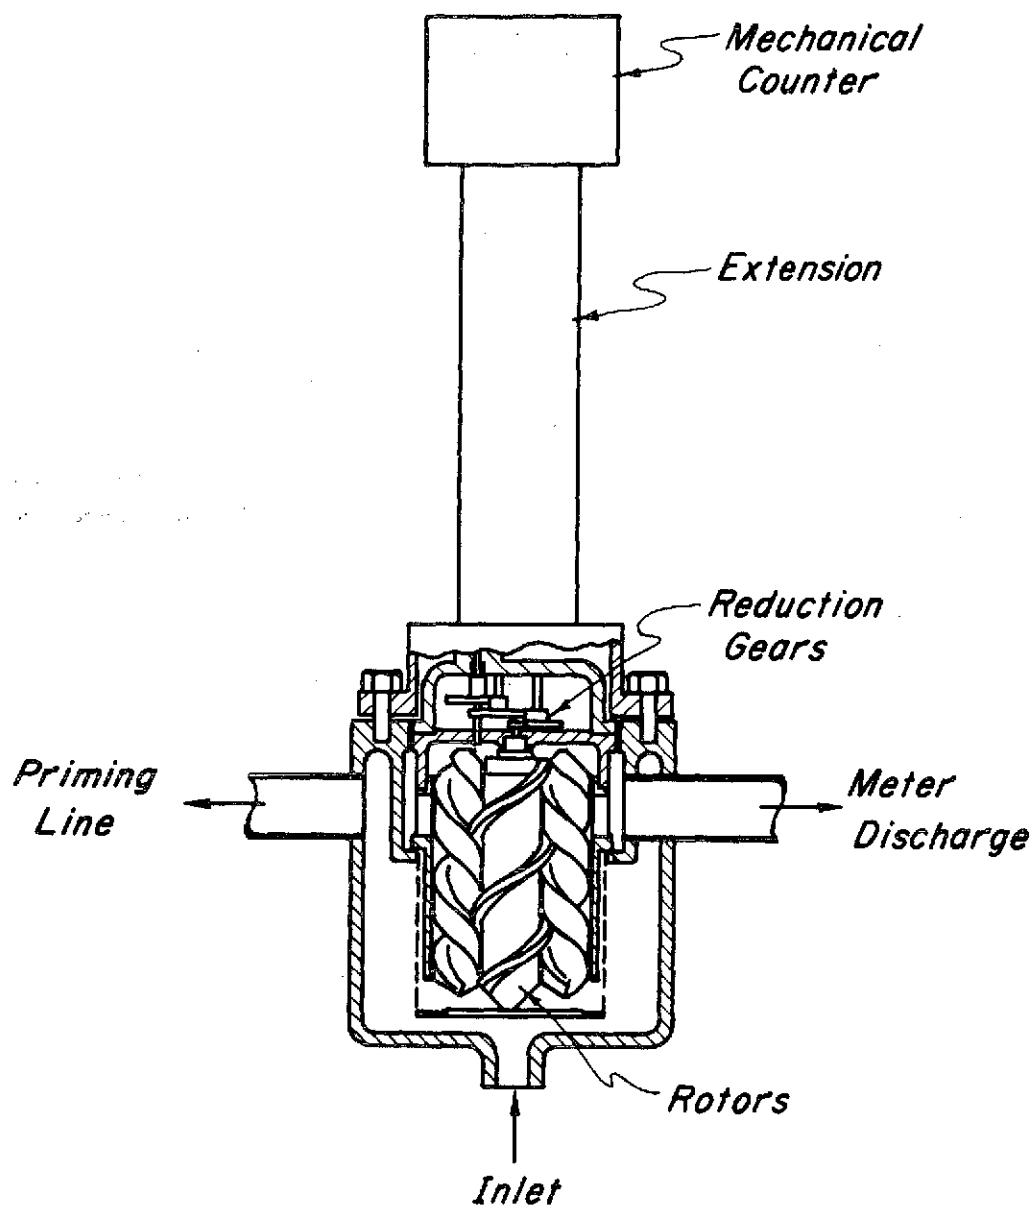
2 Screw Impeller Meter with a Mechanical Counter.
